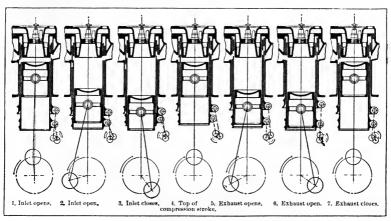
Relative Positions of Sleeves and Piston in the Operation of the Knight Engine.
